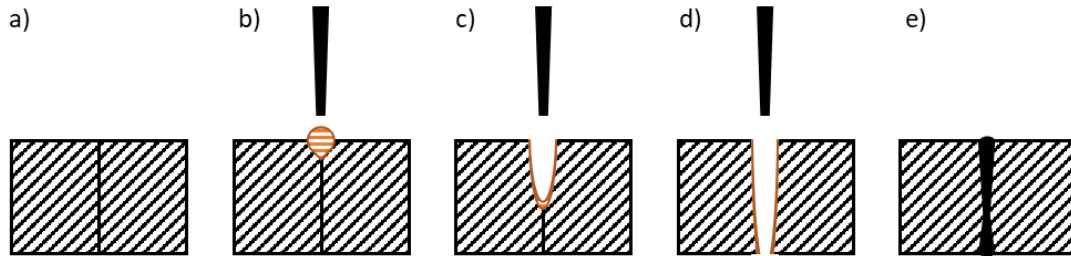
Stages of the joint formation. a) joint before welding, b) material melted on the surface, c) formation of keyhole, d) beam penetrated the workpiece, e) formed weld seam. Adapted from [1].
